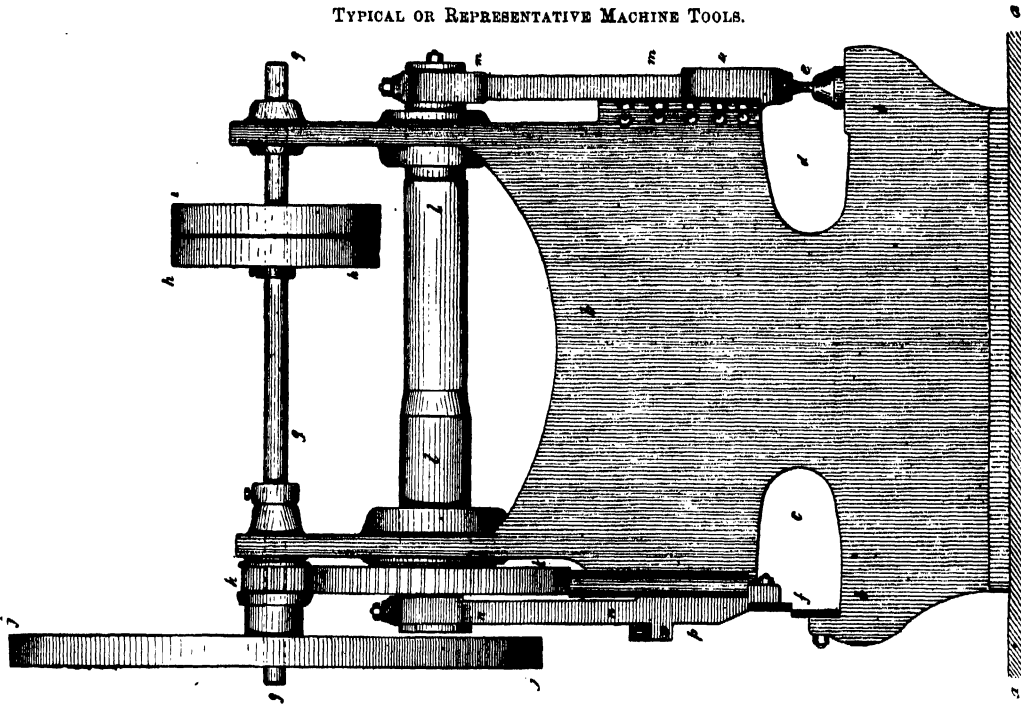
COMBINED PLATE SHEARING OR CUTTING AND PUNCHING MACHINE.
